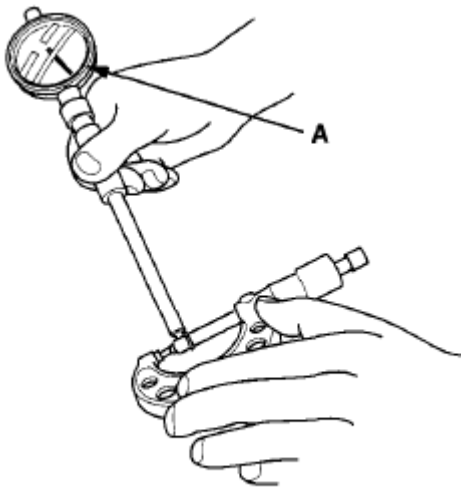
Identifying Zero Gauge In Shaft Diameter
